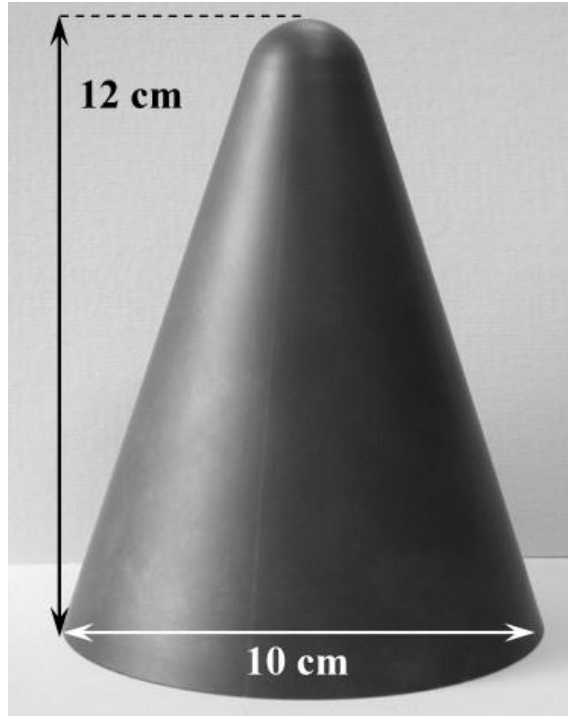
Hot pressed $\text{ZrB}_2\text{-SiC}$ block machined in the form of nose-cone using EDM technique [54].
